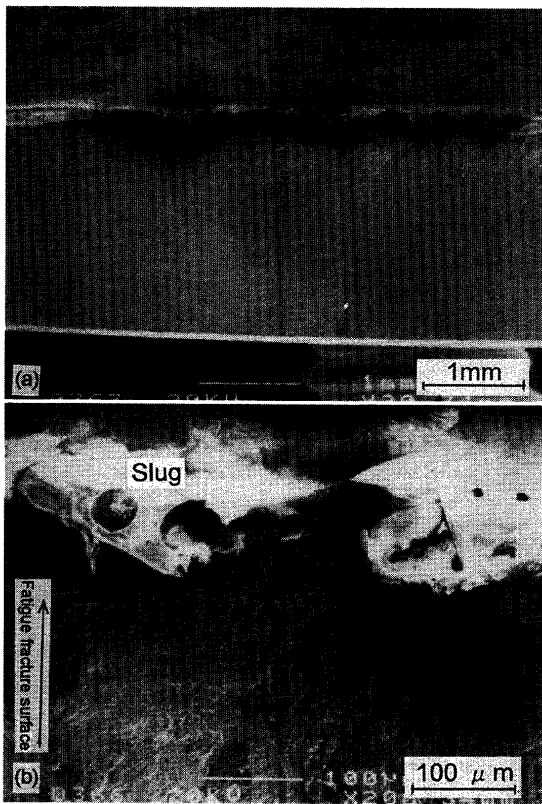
Fatigue fracture surface (FP-Base).
